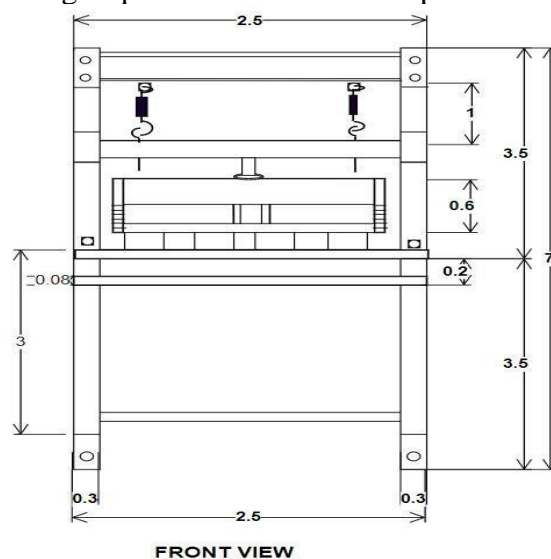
Engineering Drawing of the Automated Metal Sheet Bending Machine
